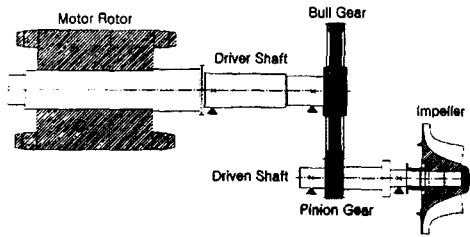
Schematic of a prototype 800RT turbo-chiller rotor-bearing system.
